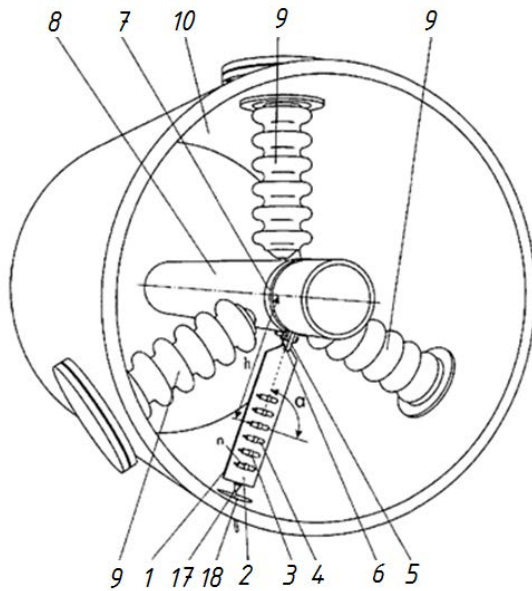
Design for Mounting Reed Switches in the Vicinity of the AC Bus of a Closed Complete Conductor
